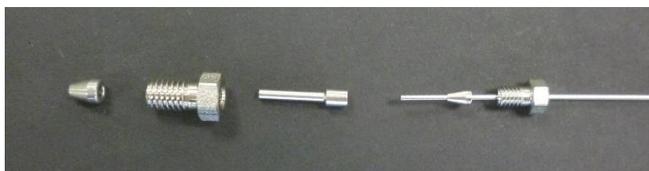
Exploded view of internal reducer (1/32" to 1/16") with the 1/32" nut and ferrule mounted on the 1/32" OD tubing
